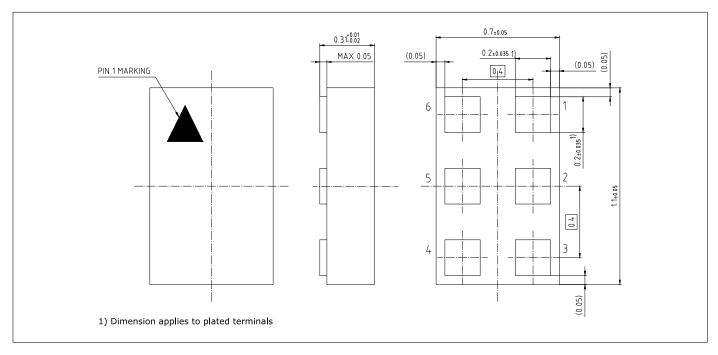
TSLP-6-4 Package Outline (Top, Side and Bottom Views)
